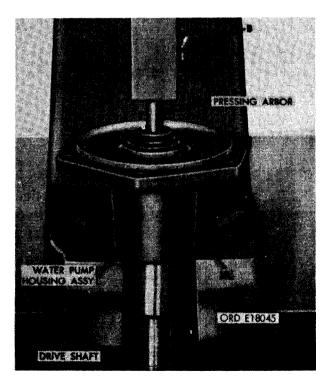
REMOVING WATER PUMP DRIVE SHAFT FROM WATER PUMP HOUSING ASSEMBLY.
